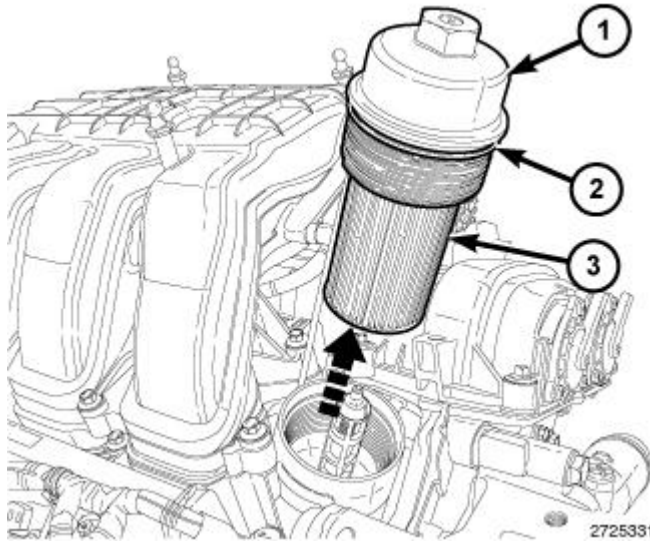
Oil Filter Cap, O-Ring Seal & Oil Filter
